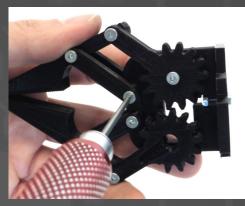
Use 2 M3x20 mm bolts and 2 M3 SL nuts for the assembly shown here. (Make sure the parts move freely)
